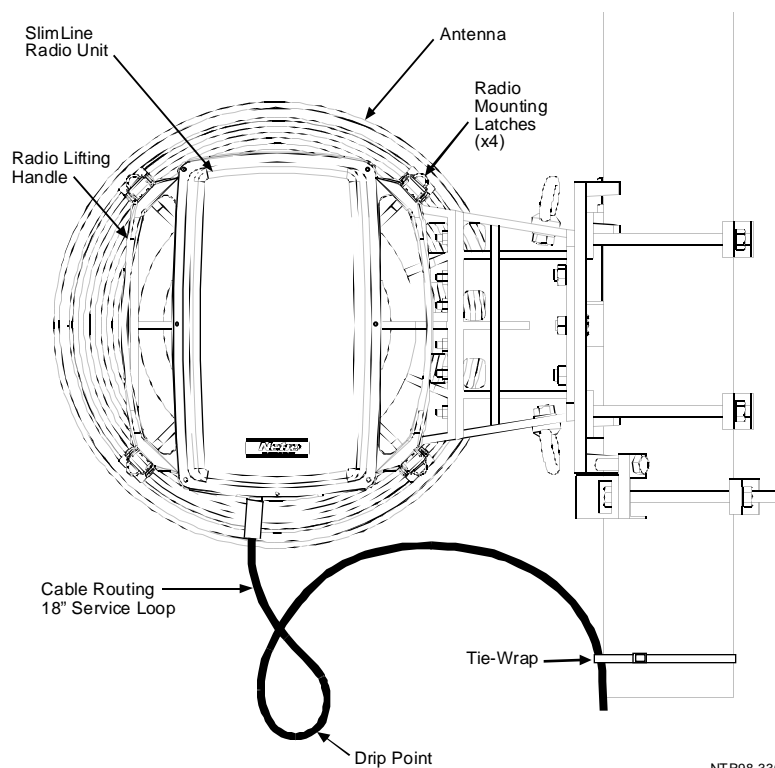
Finished SlimLine Radio Mounting: Rear View
